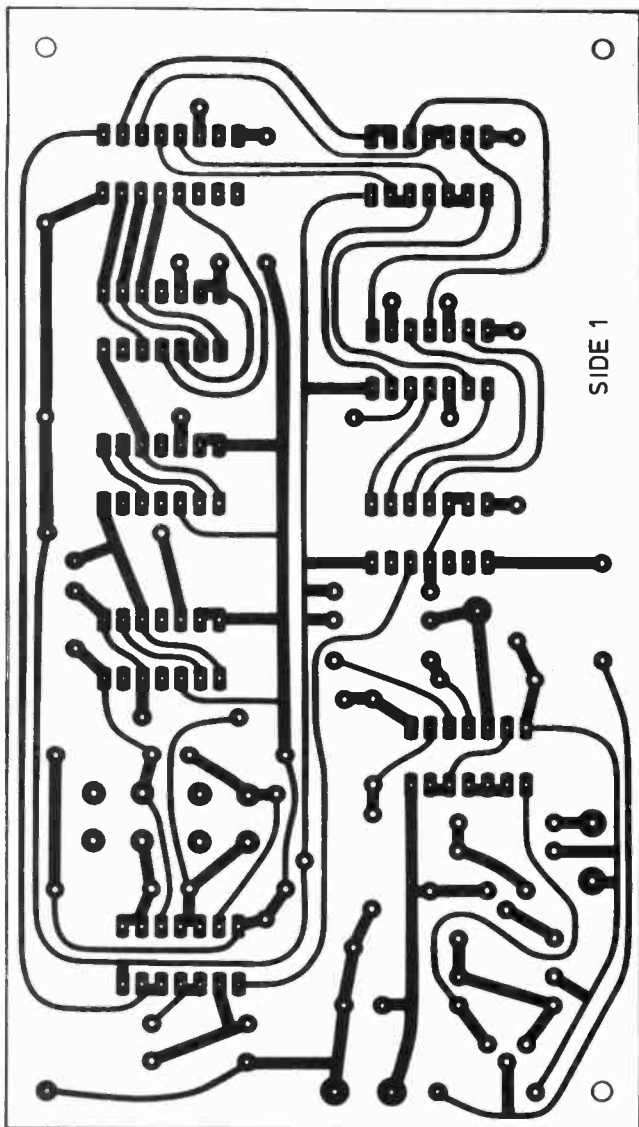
The double-sided PCB used in the prototype. Scale 1:1.
